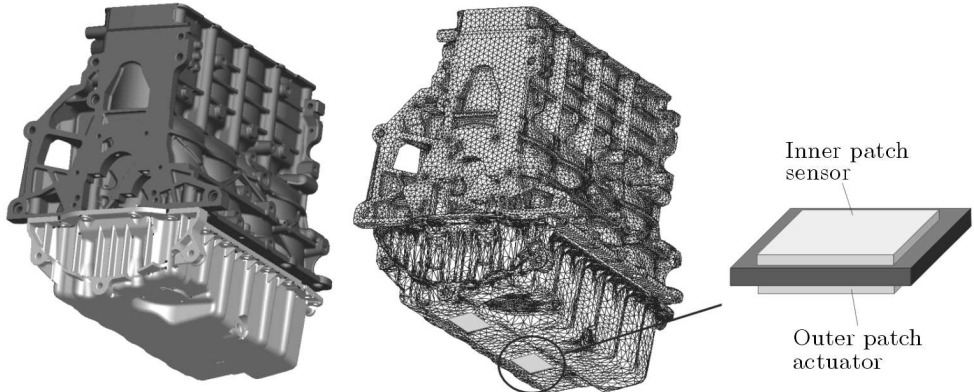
Layout and conforming FE-FE-BE mesh of the stripped car engine
